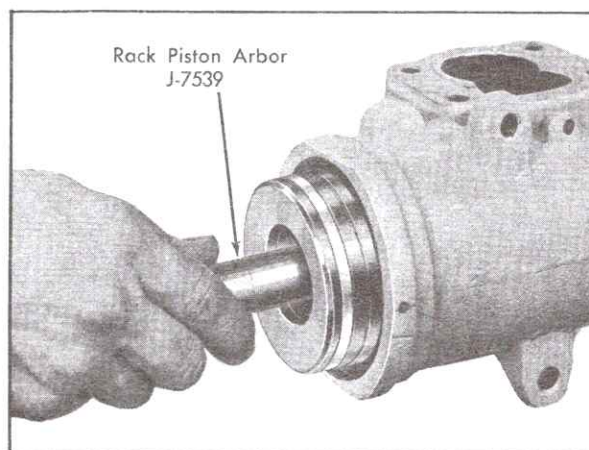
Installing Rack-Piston Arbor Tool in End of Worm
